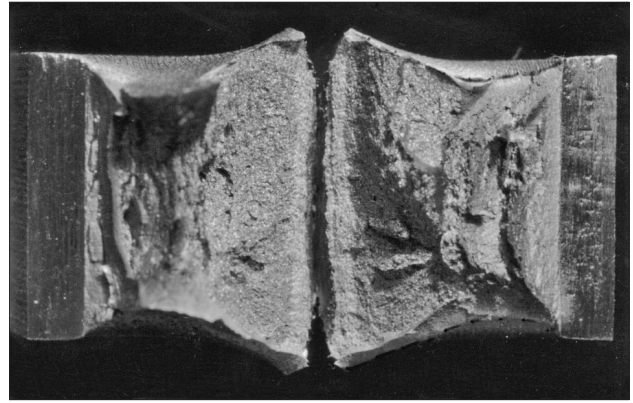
Fracture surface of a Charpy specimen broken after ejection
